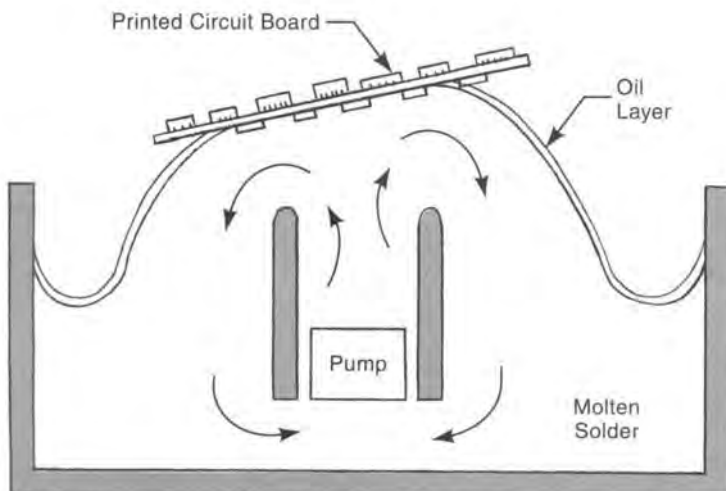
C5 Schematic representation of the wave-soldering process. The printed circuit board, with components attached, is moved against a "wave" of molten solder. Pads, leads, and wire paths on the board are wetted by and coated with solder. An oil layer on the molten solder inhibits the formation of dross.
